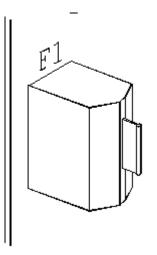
AC Fuse Holder on the GC Controller Terminal Board, Lower Left Corner
